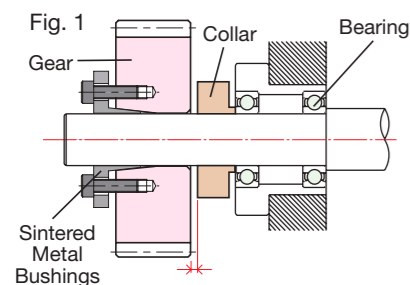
Clearance (Assembly conditions require clearance of 1 mm or more)
